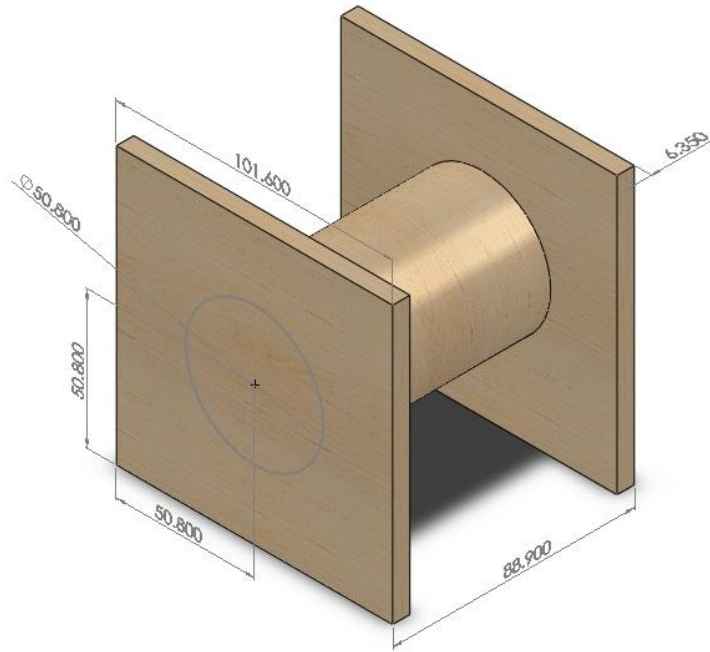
WODDEN CORE DIMENSIONS (MM)
